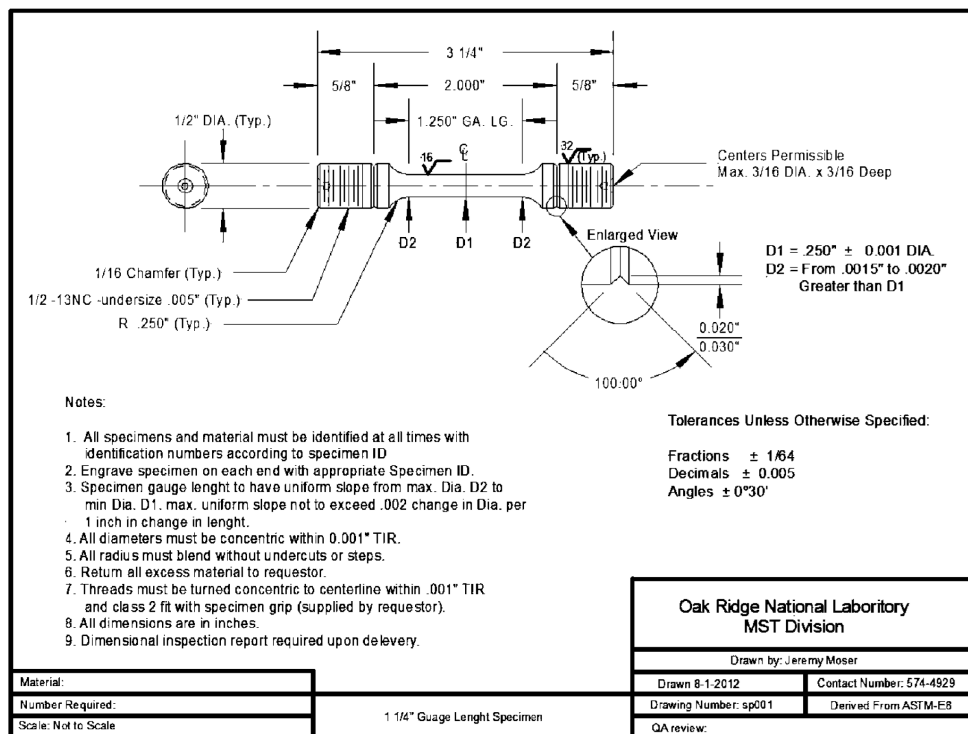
A709 tensile code case testing specimen geometry. All dimensions are in inches.
